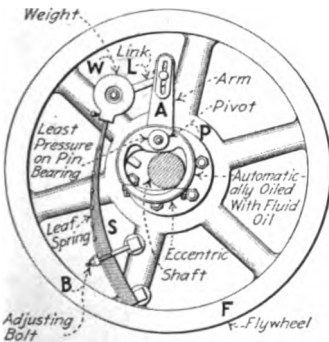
Side view of shaft governor of the "Ideal" Corliss-valve engine.
